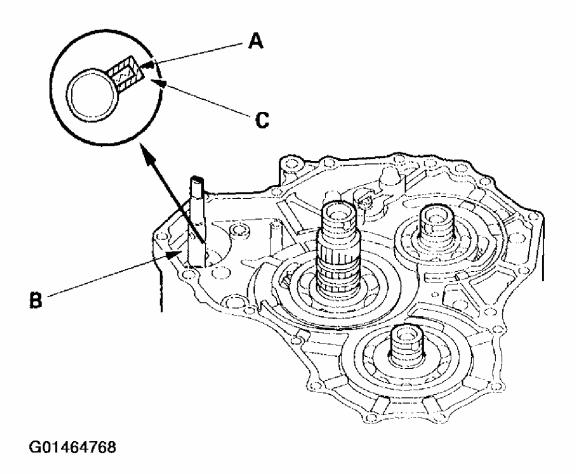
Aligning The Spring Pin On The Control Shaft With The Transmission Housing Groove
